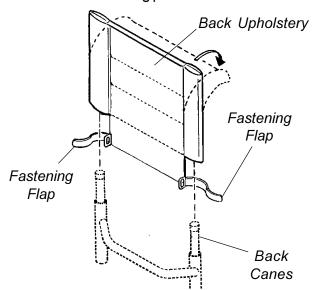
BACK UPHOLSTERY - REMOVING/INSTALLINGADJUSTING OPTIONAL BACK UPHOLSTERY - BACK CANES WITHOUT PUSH HANDLES
